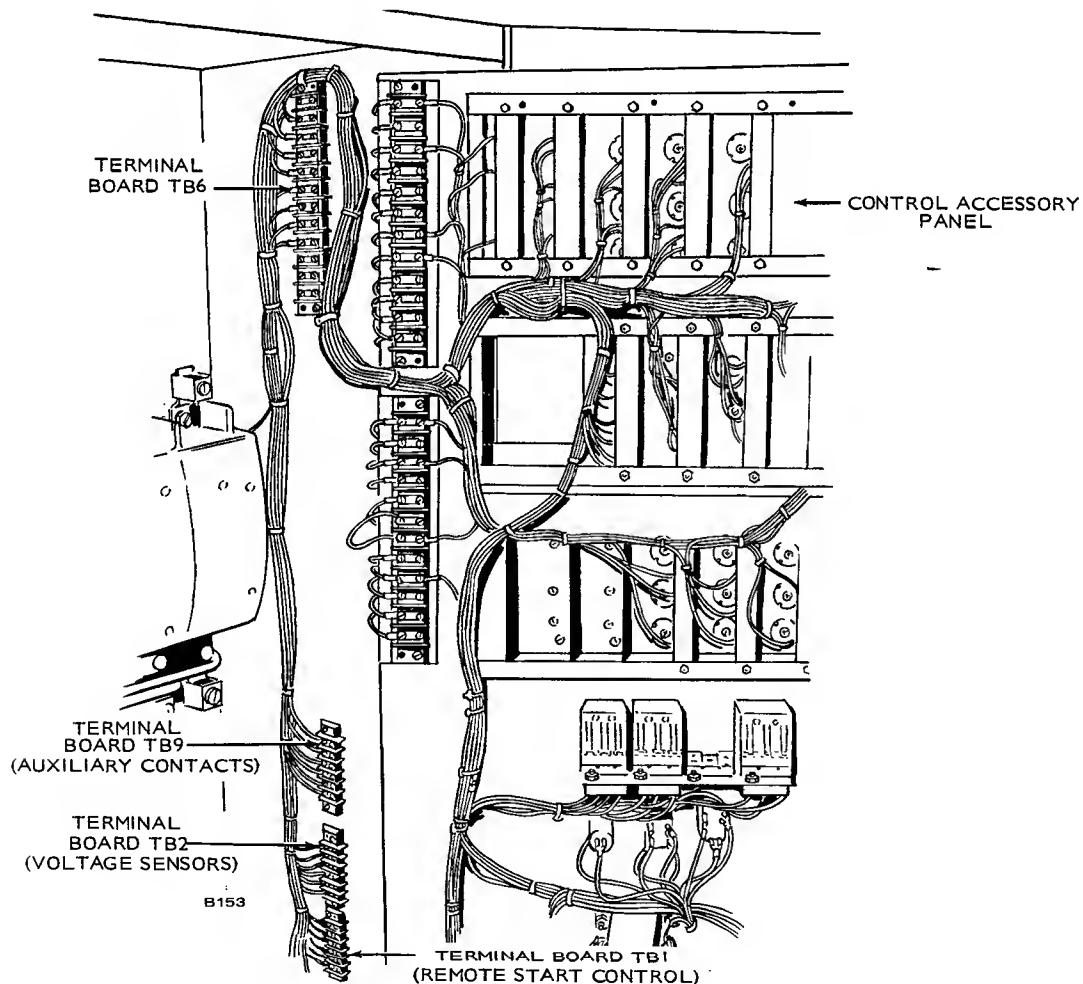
TERMINAL BOARD CONNECTIONS FOR CONTROL ACCESSORY PANEL
